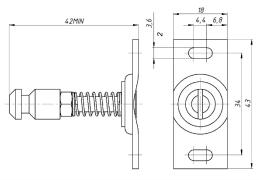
Promix-AD.DB.19 latch overall and mounting dimensions
